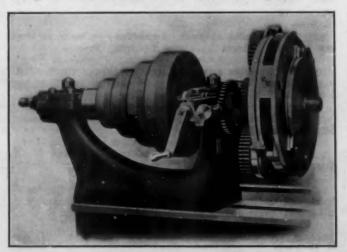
ELLIPTICAL CHUCK FOR SPEED LATHE.
